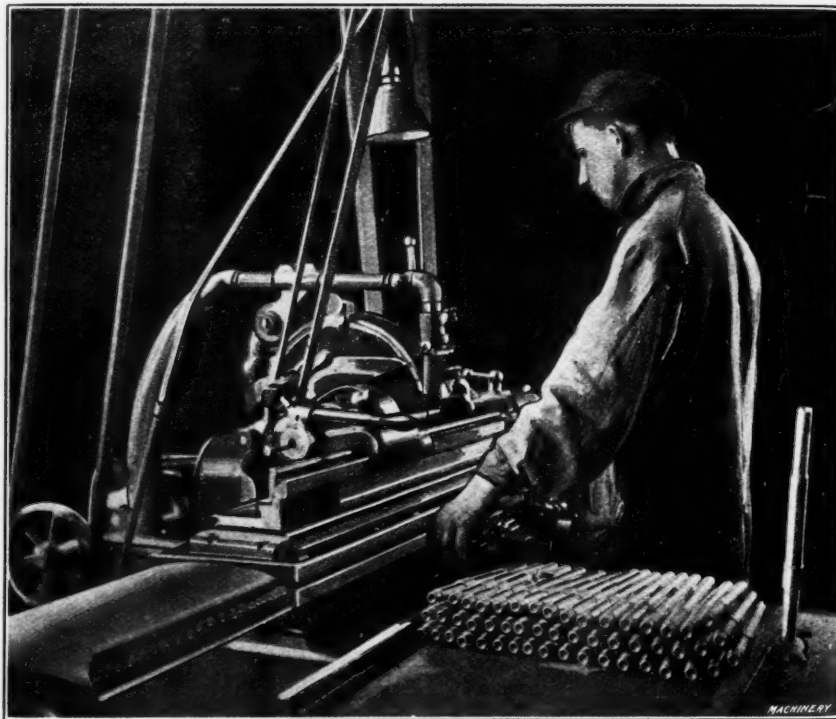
Grinding Armature Shafts on a Norton Plain Grinding Machine
